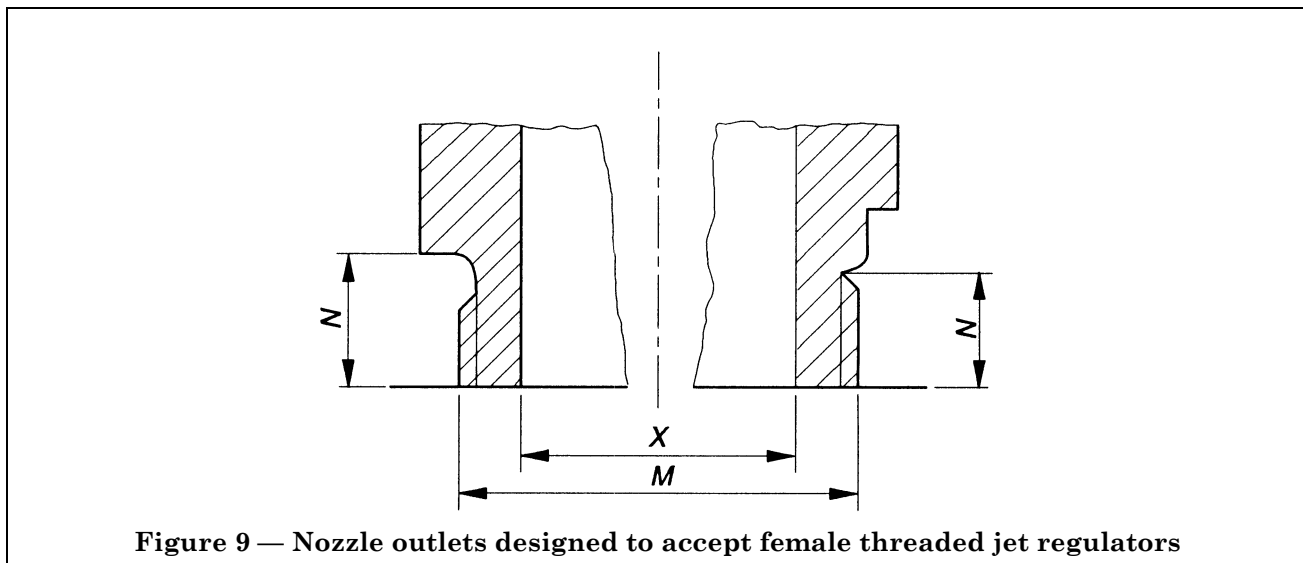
Nozzle outlets designed to accept female threaded jet regulators
